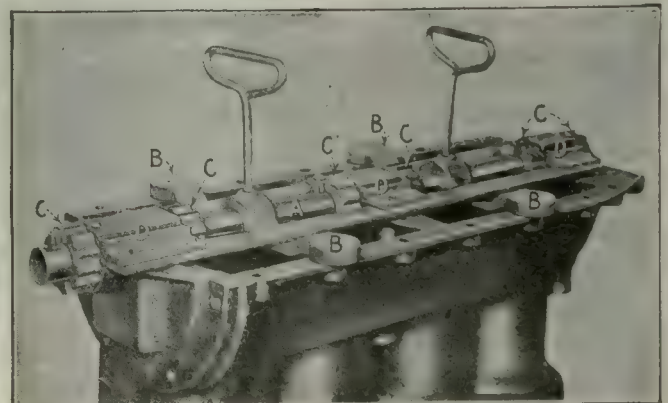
A JIG FOR REBABBITTING THE CRANKSHAFT BEARINGS
